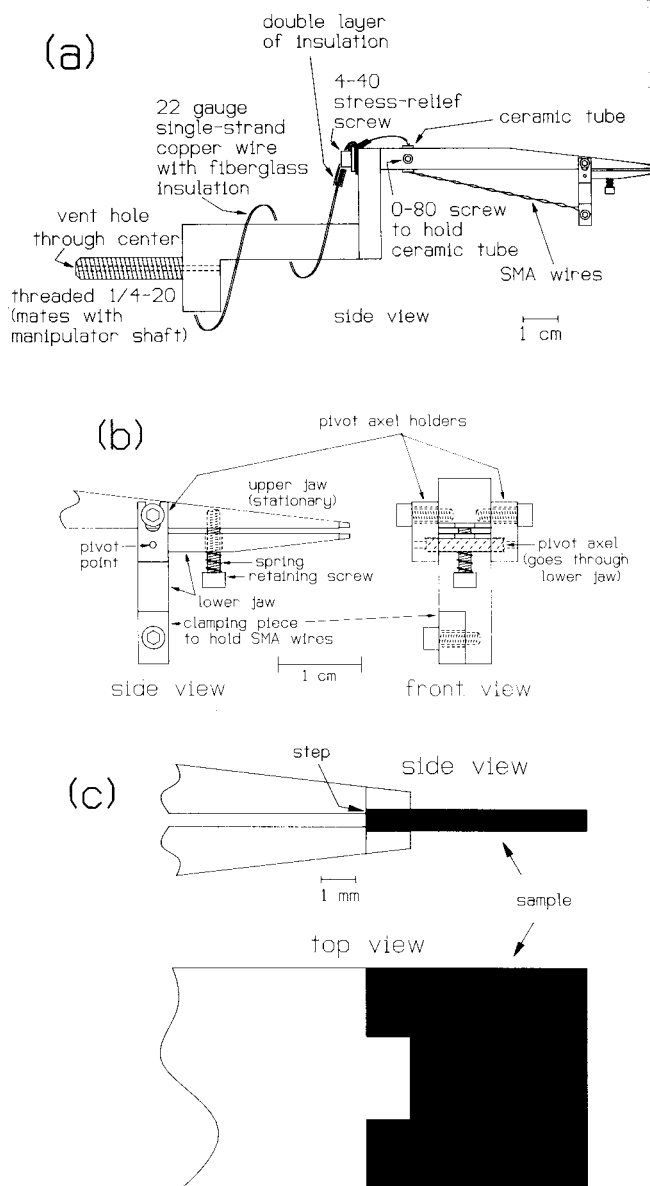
(a) Schematic diagram of manipulator head. All dead-end screw holes are vented, either with small vent holes or with center-drilled screws. (b) Close-up of jaw mechanism. The spring-retaining screw is also used for spring tension adjustment. The threads near the head of this screw are sanded down, to allow smooth motion of the jaw. The spring is 3/8 in. long, 1/8 in. outer diam, and is made of 0.018 in stainless wire (PIC Design, Middlebury, CT). (c) Close-up of jaw tips holding a sample.
